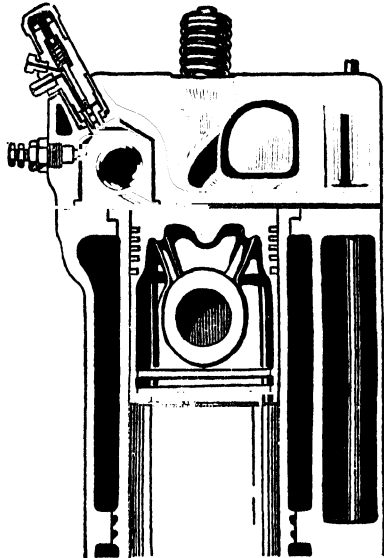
Silver Comet Cylinder and combustion chamber in section view, showing the wet-sleeve liner, five-ring aluminum piston, single-piece combustion chamber insert, pintle-type injector, and glow-plug for cold-weather starting.
